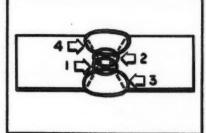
Counteracting shrinkage forces by alternately welding on each side of a plate.
